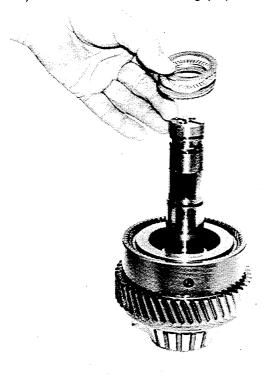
Removing or Installing the Clutch Hub and Pinion Assembly.
